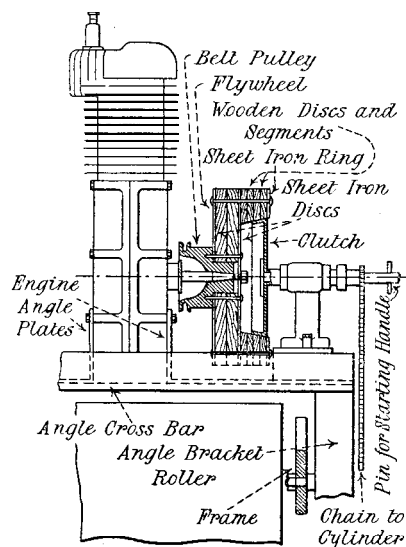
Part Front Elevation of Motor-driven Lawn Mower.
